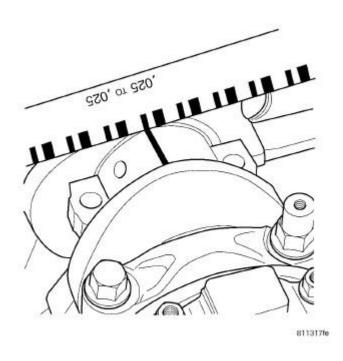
CONNECTING ROD BEARING CLEARANCE Courtesy of CHRYSLER LLC
